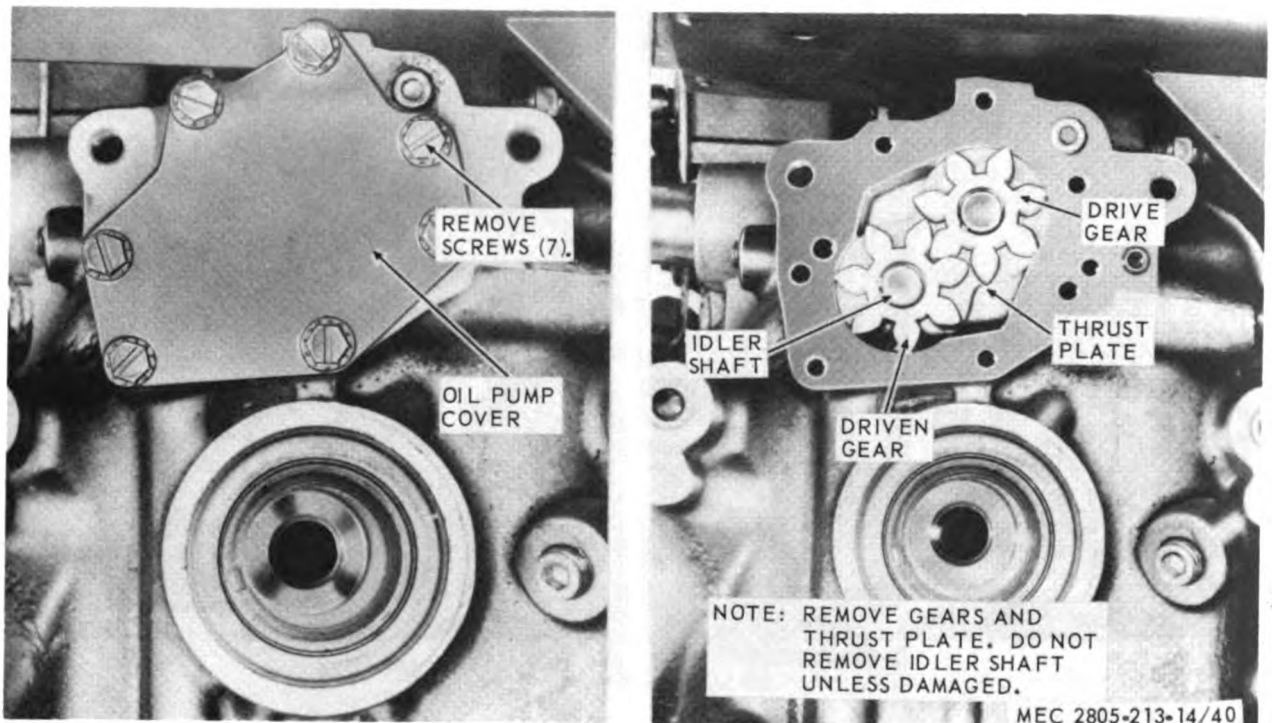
Oil pump cover and oil pump gears, removal and installation.
